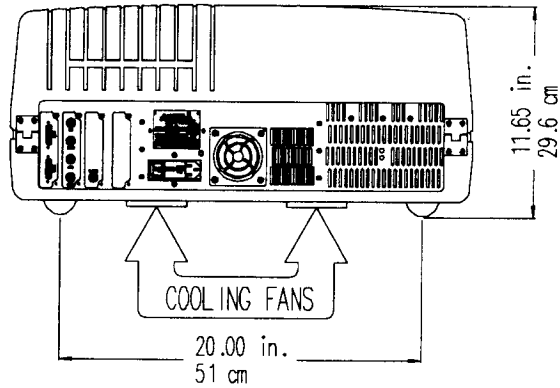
AMPRO 3600 CASE DIMENSIONS.
